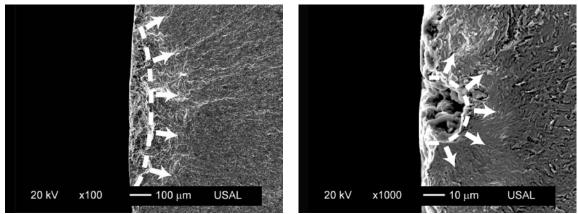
Initiation of fatigue crack growth from a surface defect: hot rolled bar (left) and prestressing steel wire (right), including arrows to identify the fatigue crack growth from defect
